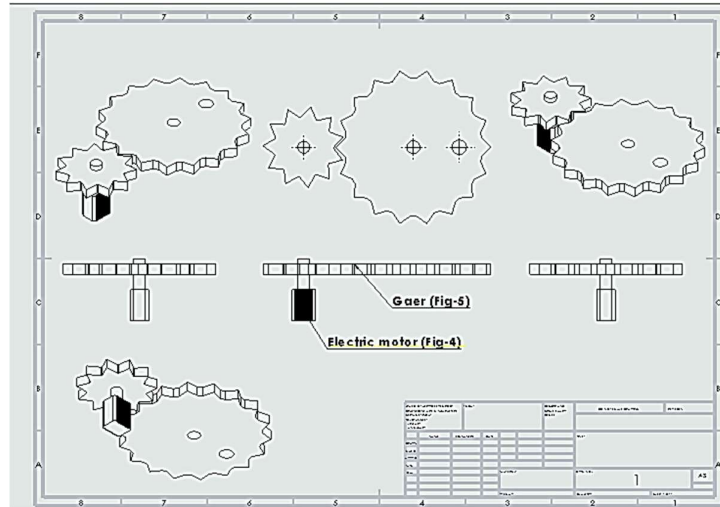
Gear fig-5 gearbox and Electric motor fig-4 from different angles
